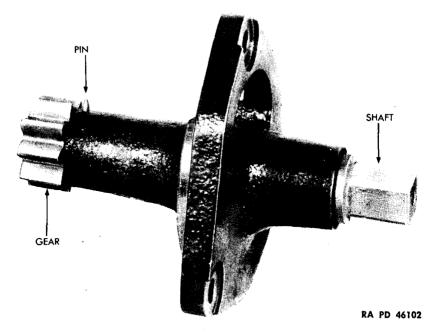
Fixture, Engine Turning, Tool No. 41-F-2997-382
